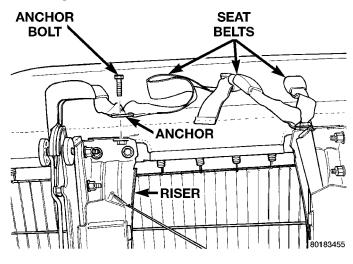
Seat Belt Buckle Second Rear—3 Passenger Bench
